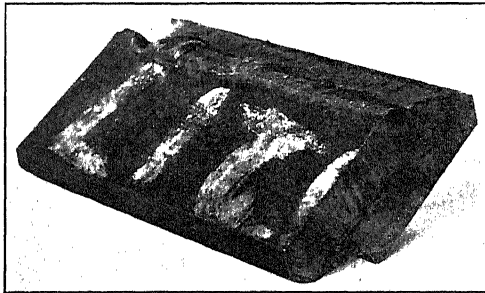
Two $\frac{1}{2}$ -IN. SHIP PLATES AUTOMATICALLY WELDED BY METALLIC-ELECTRODE ARC PROCESS TO FORM LAP JOINT.
